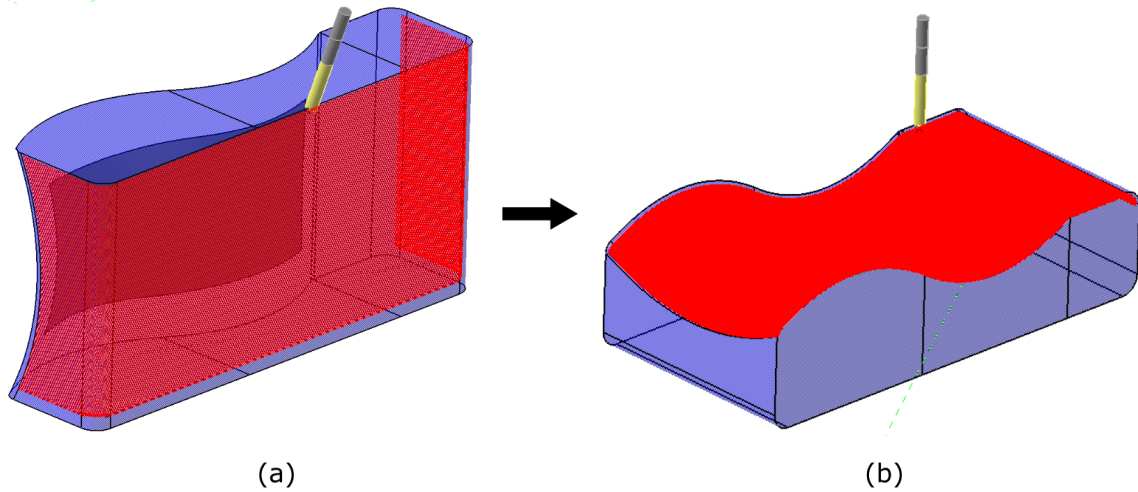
Machining process of the mold life experiment tool. (a) Bottom and the side of the tool machining using a 5-axis CNC milling machine. (b) Top surface machining using a 3-axis CNC milling machine.
